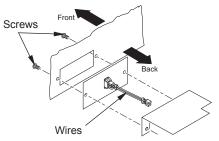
Switch Plate and Wiring Harness (Switch Plate and Orientation May Vary Depending On Model)
